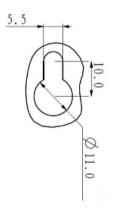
Dimensions: Keyhole in detail (KBox C-101-1)
